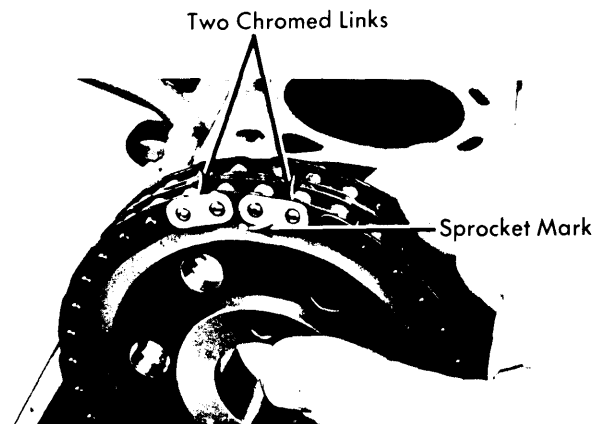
Aligning Camshaft Sprocket & Timing Chain
